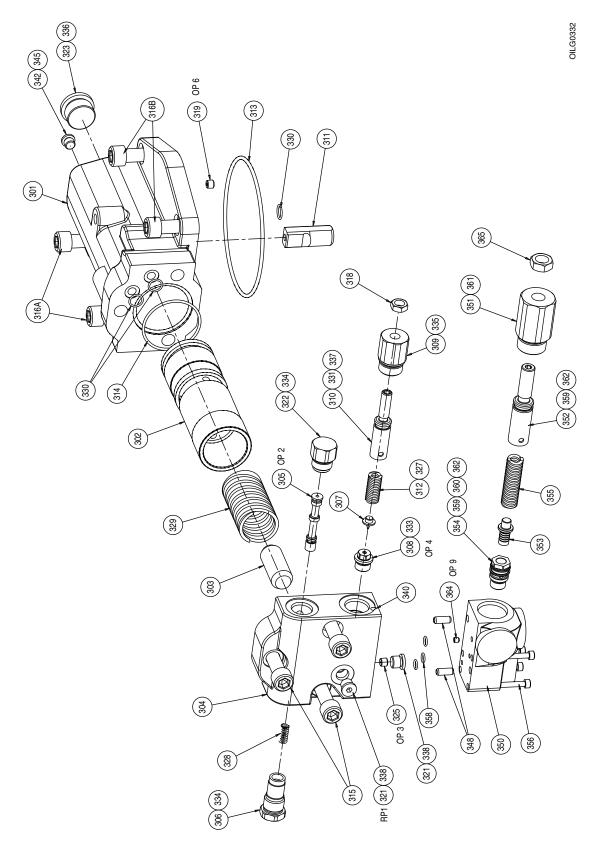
Exploded Parts Drawing for "P-1NN/F" Single Pressure Compensator w/Load Sense, Series F1U Control (516336-200 sheet 1)
